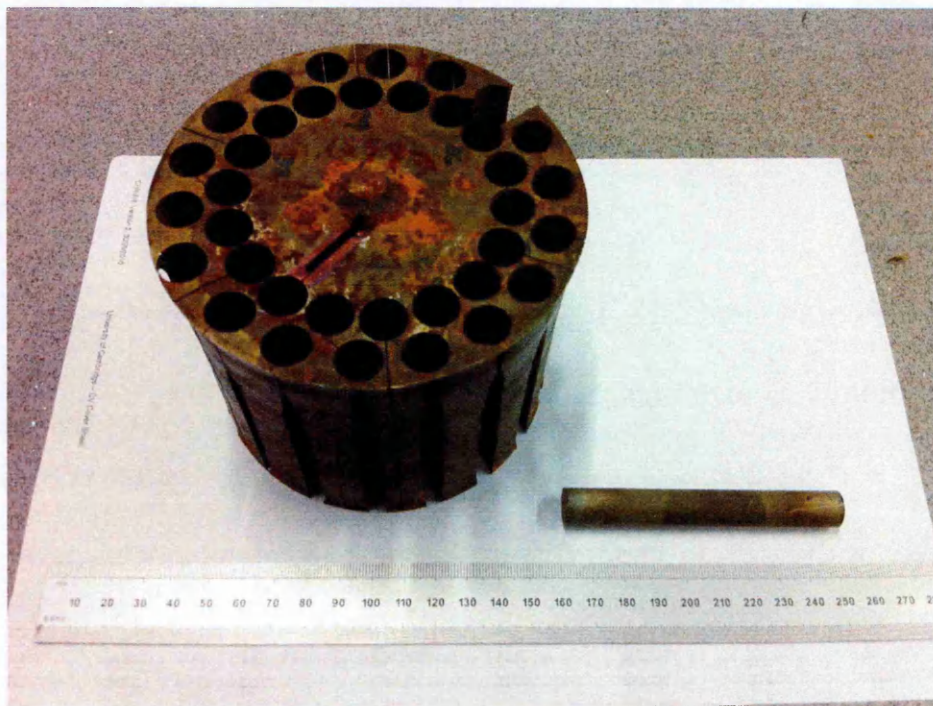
Extruded billet with 12 mm cylinders extracted
